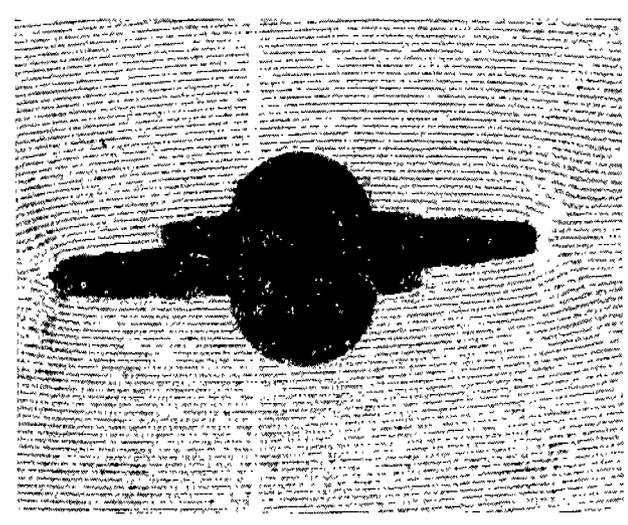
HOLE, SAW CUT AND FATIGUE CRACK UNDER HIGHER EXTERNAL LOAD. NOTE THE PLASTIC DEFORMATION AT THE TOP OF THE CRACK.
